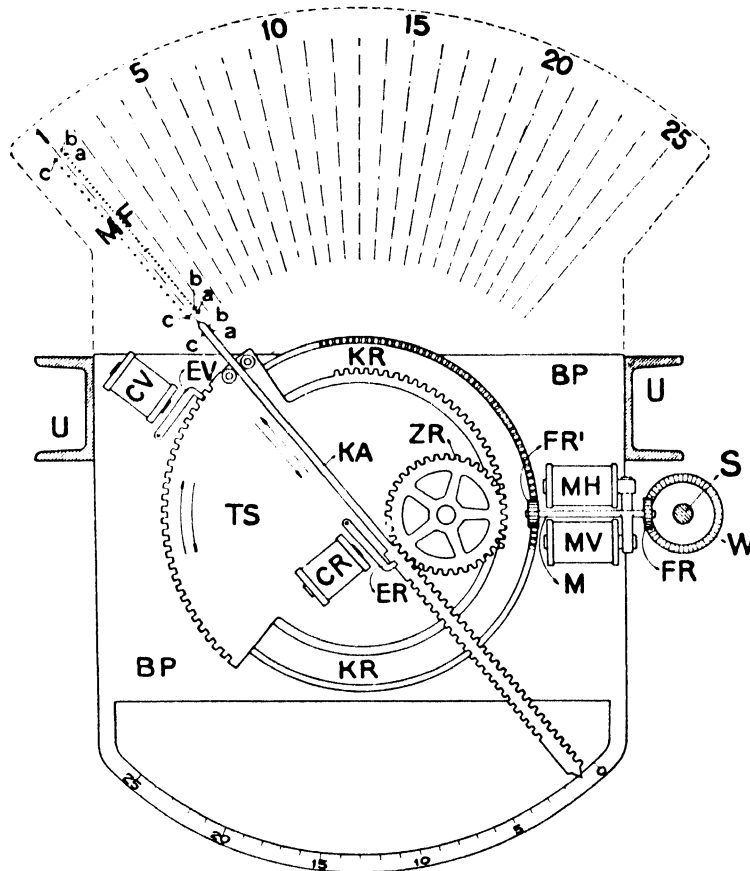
MECHANICAL ARRANGEMENTS OF SELECTOR MECHANISM
